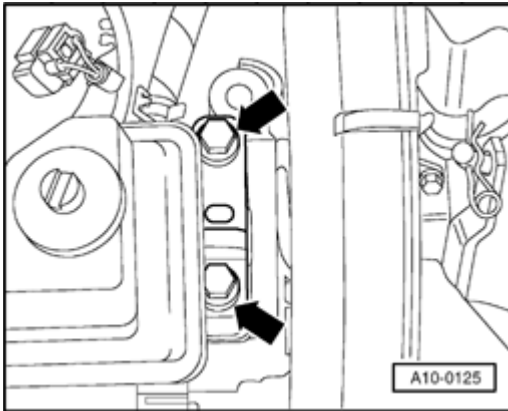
Locating Engine Carrier Bolts (Engine Side)
